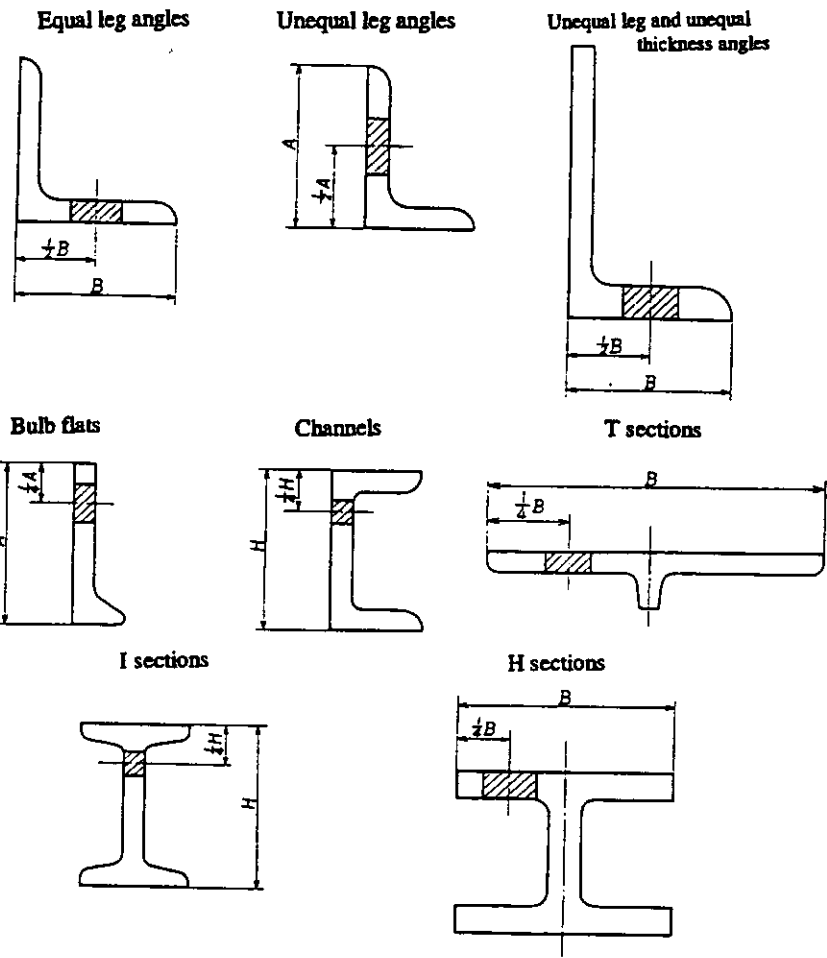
Sampling Position of Test Piece in Tensile Test and Bend Test for Shape Steels
